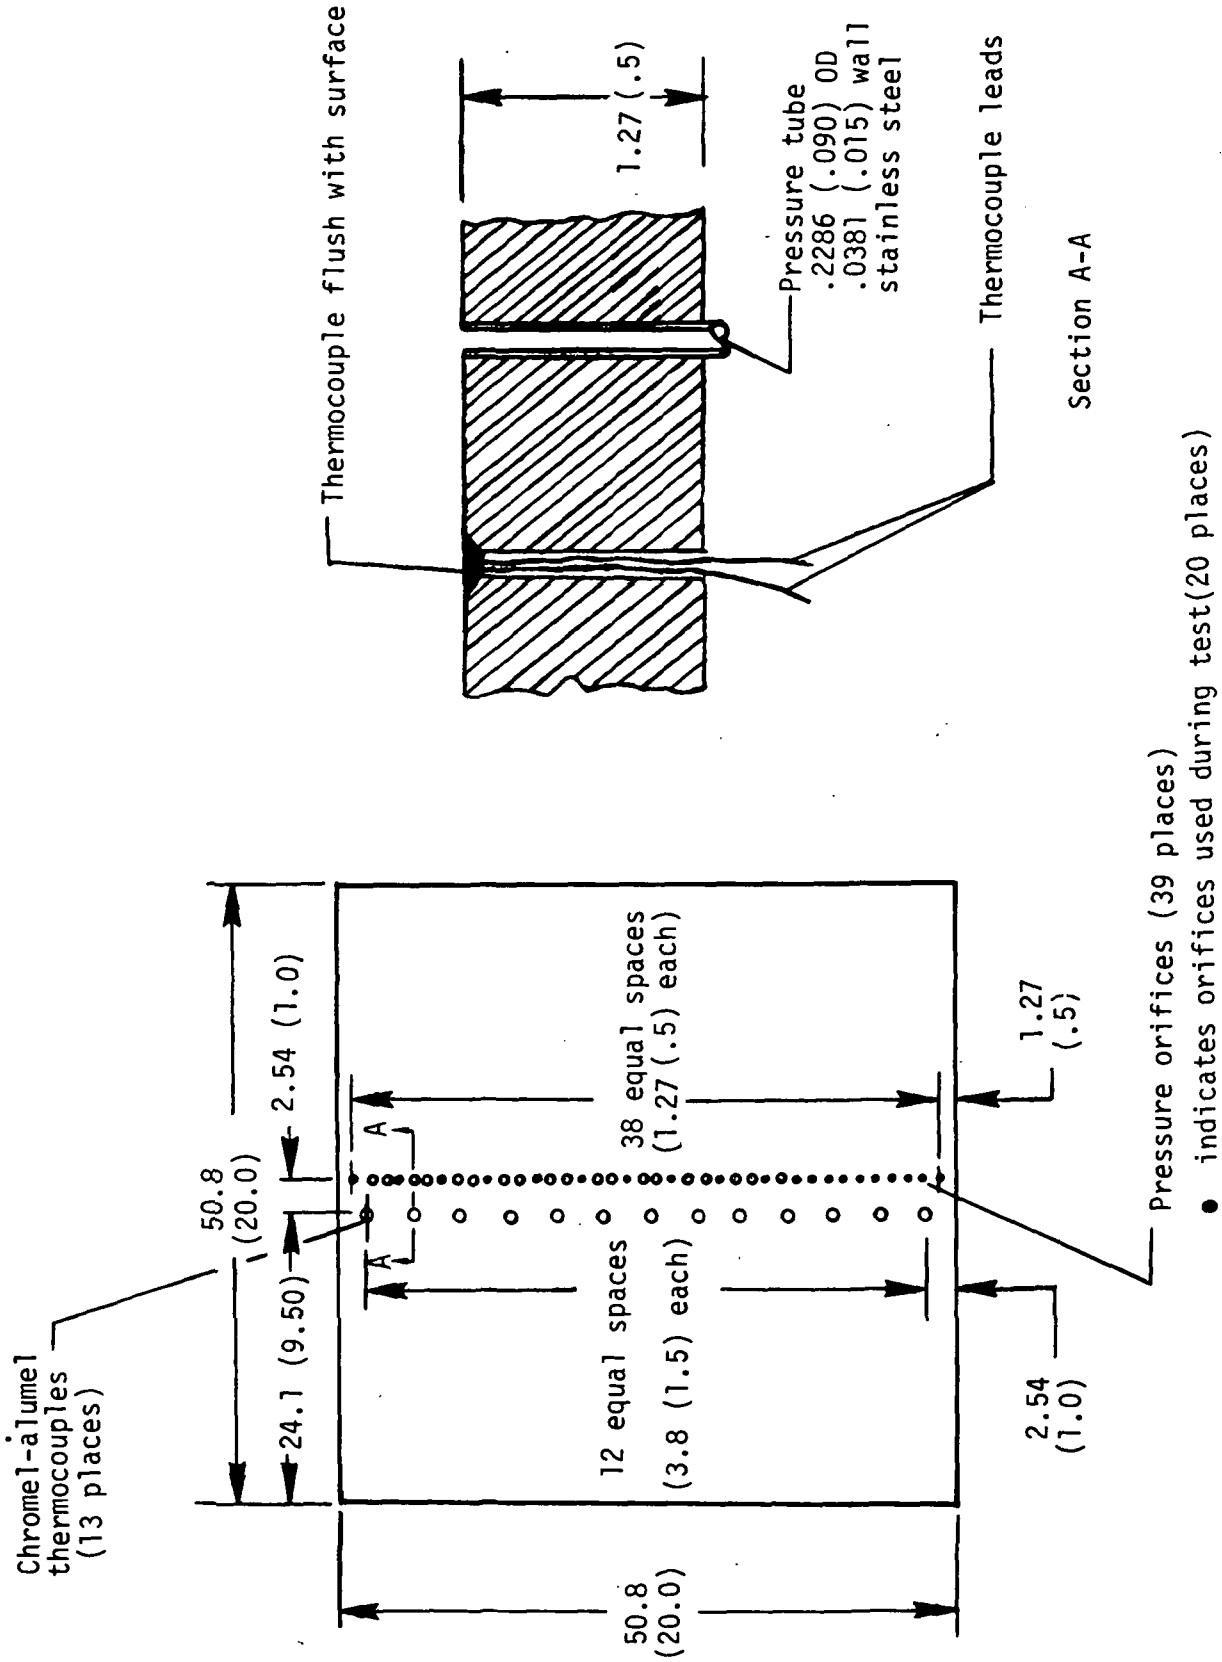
Sketch of elevon plate. All dimensions are in centimeters (inches).
